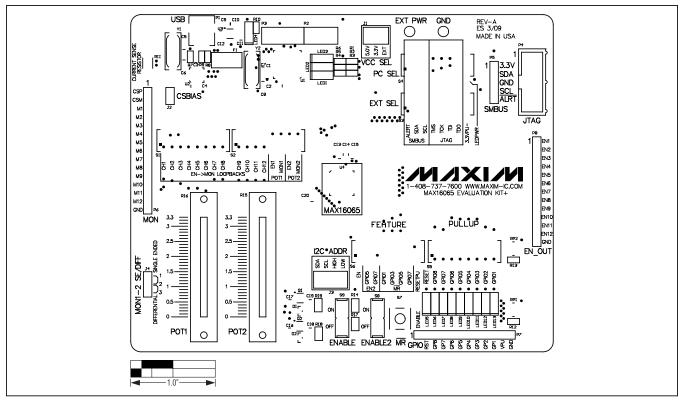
MAX16065EV Kit Component Placement Guide—Component Side
